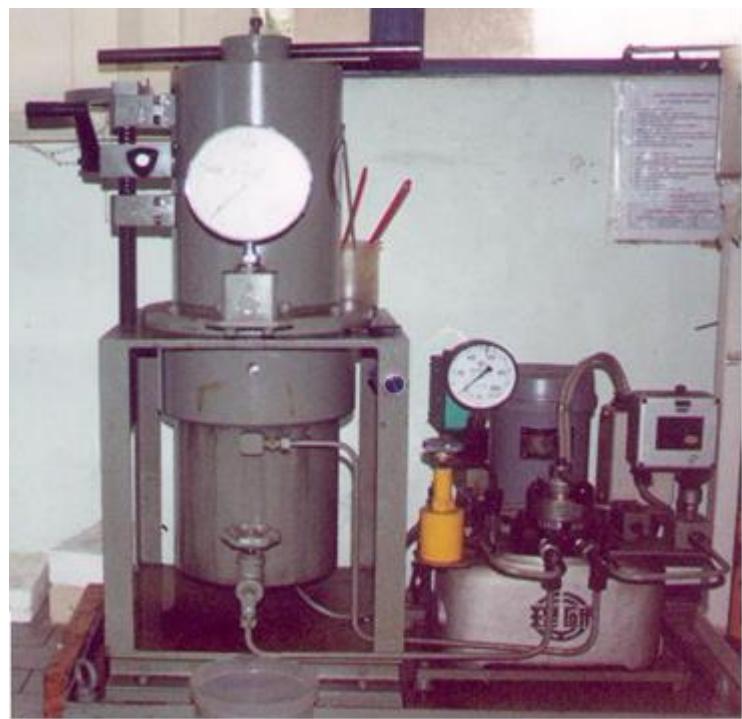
Cold Isostatic Press Machine (Reiken Seiki Japan)
